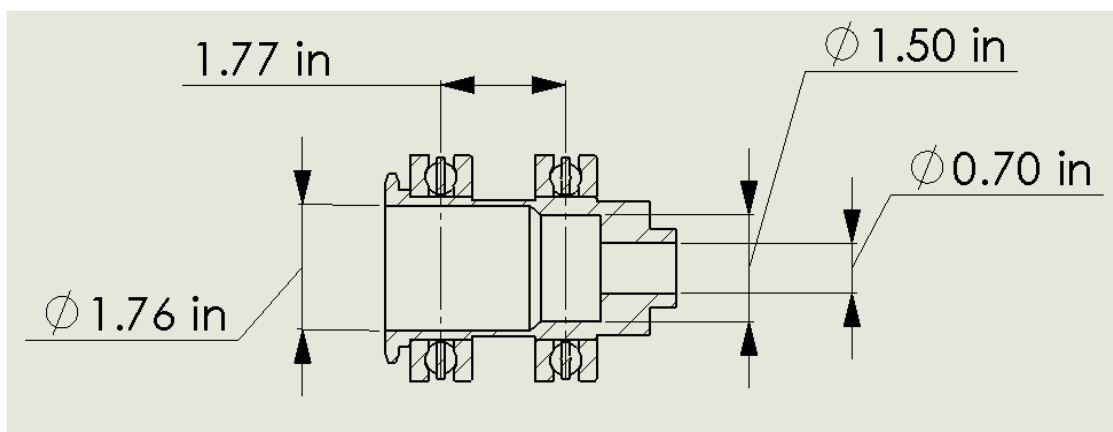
Bearing ball proposed configuration and dimensions
